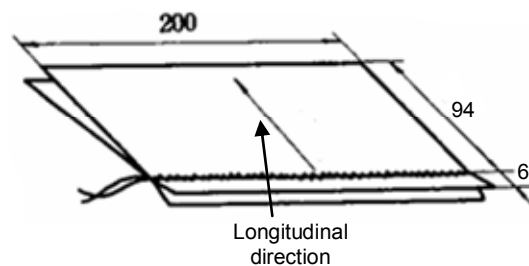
A: Dimensions of seam strength test piece (Longitudinal)
